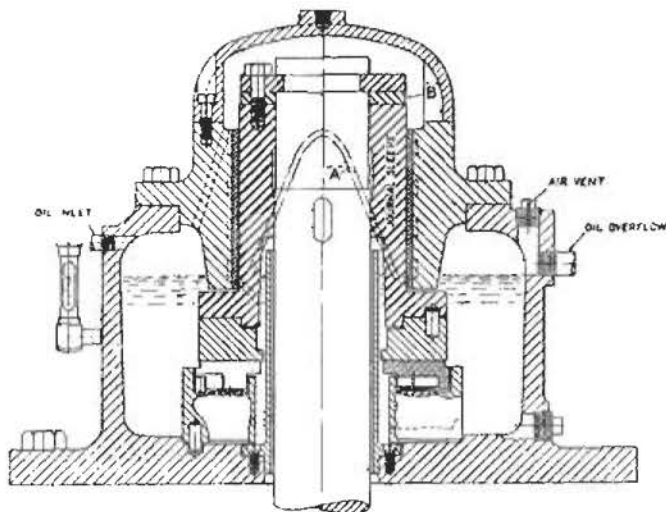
Combined thrust and radial bearing for heavy loads and slow speeds. Thrust bearing shown is Style KV or LV.
